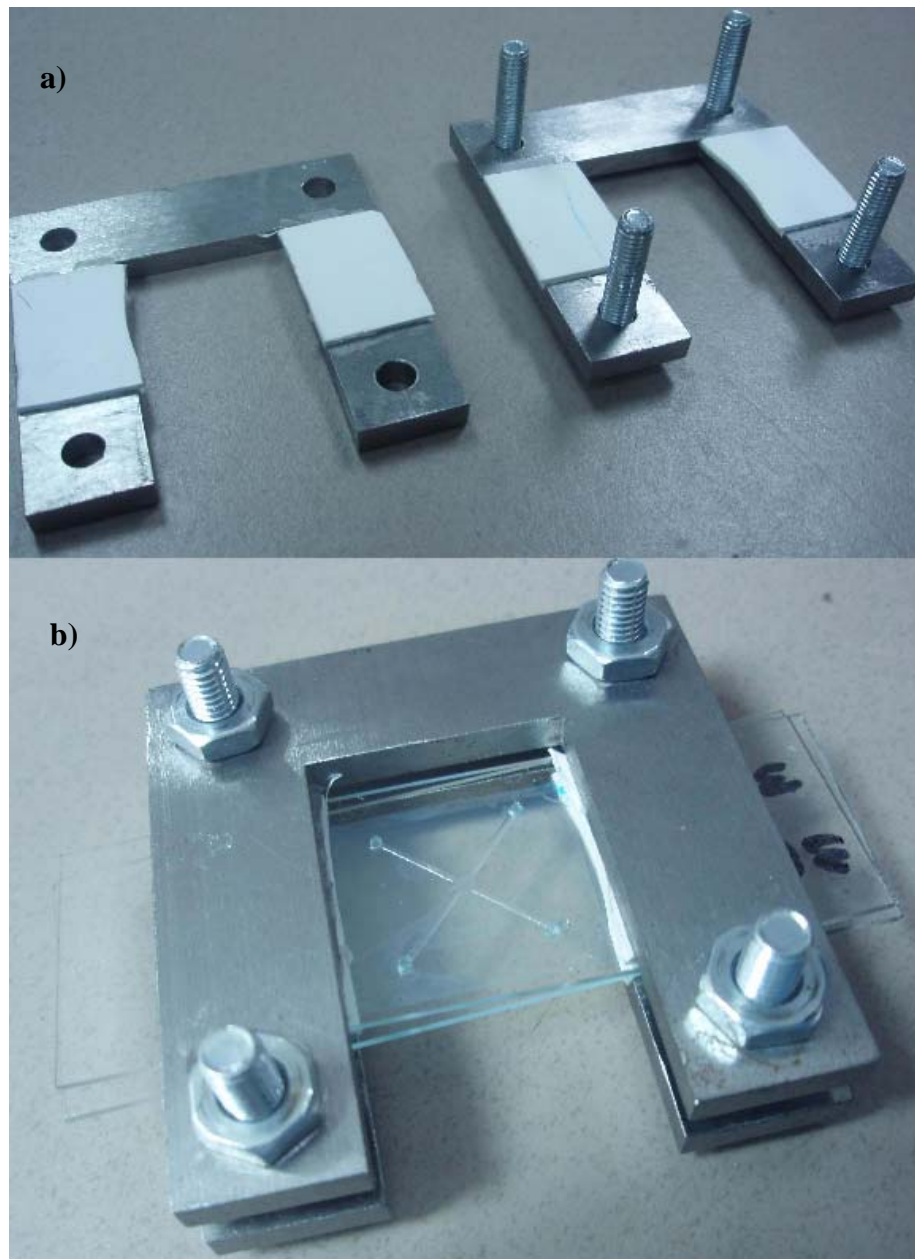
Custom made C-shaped clamp. a Exploded view. b Assembly
